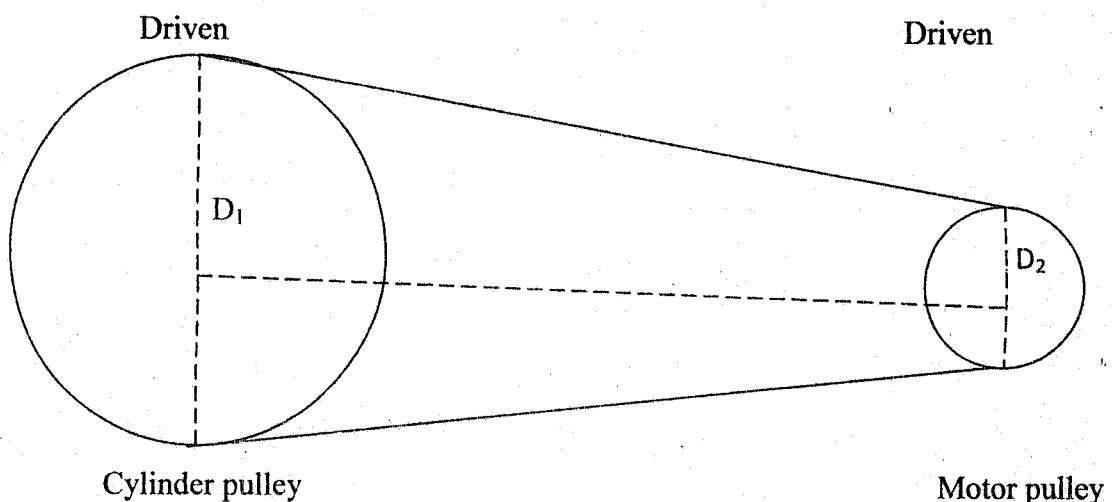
Motor-cylinder Pulley Belt Arrangement
